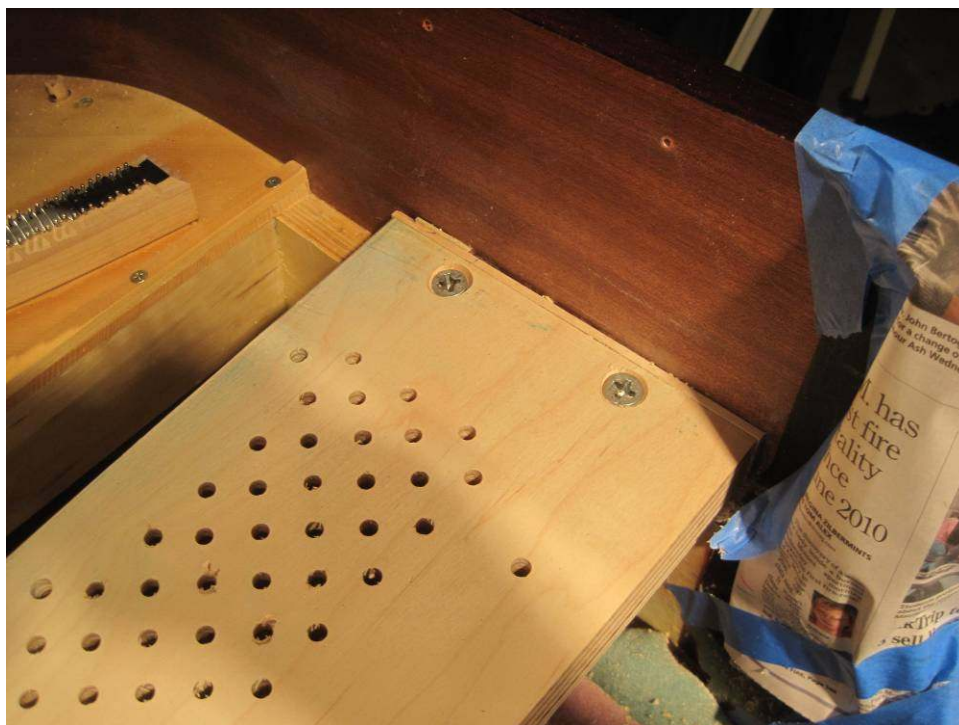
The pinblock glued and screwed into place. The block was deliberately cut 1/8 short on either end to allow for lowering the plate with attached pinblock smoothly into the piano. The original pinblock fit so tightly it had to be knocked out of place with a mallet. Because of the fact that I drill the block on the drill press, and not after it's installed in the piano (as the factory does), adequate clearance needs to be allowed to be able to raise and lower the plate and block with the hoist without it binding. Therefore the necessity for the shims to fill the gap.
